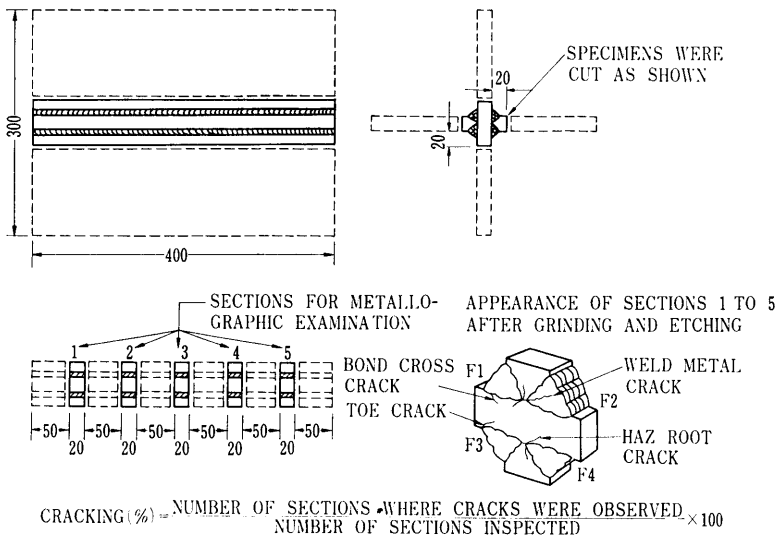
Details of the sectioning and inspection procedure for cruciform-shaped specimen.
